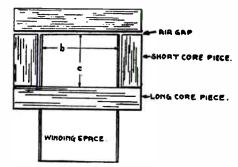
CORE ARRANGEMENT FOR FILTER CHOKE COILS
